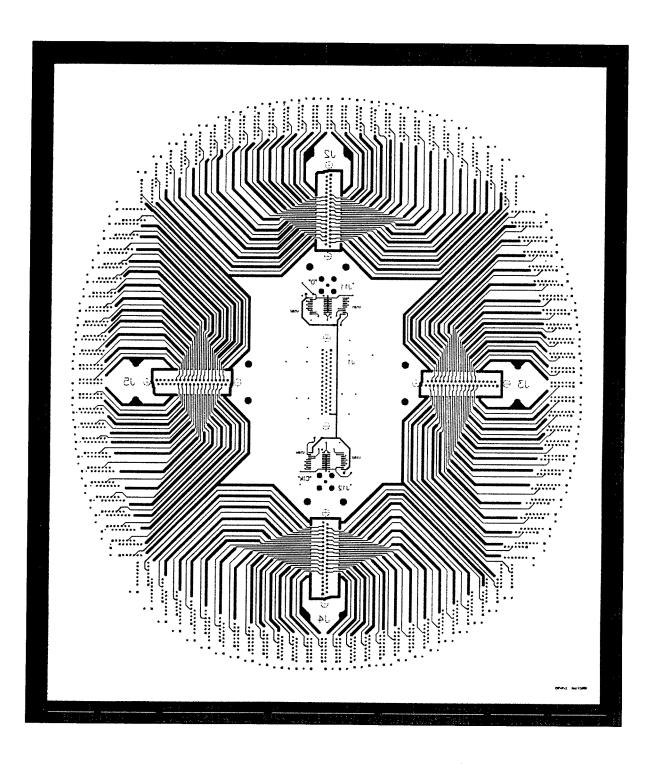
Bottom Circuit Layer of Digital Test Fixture.
